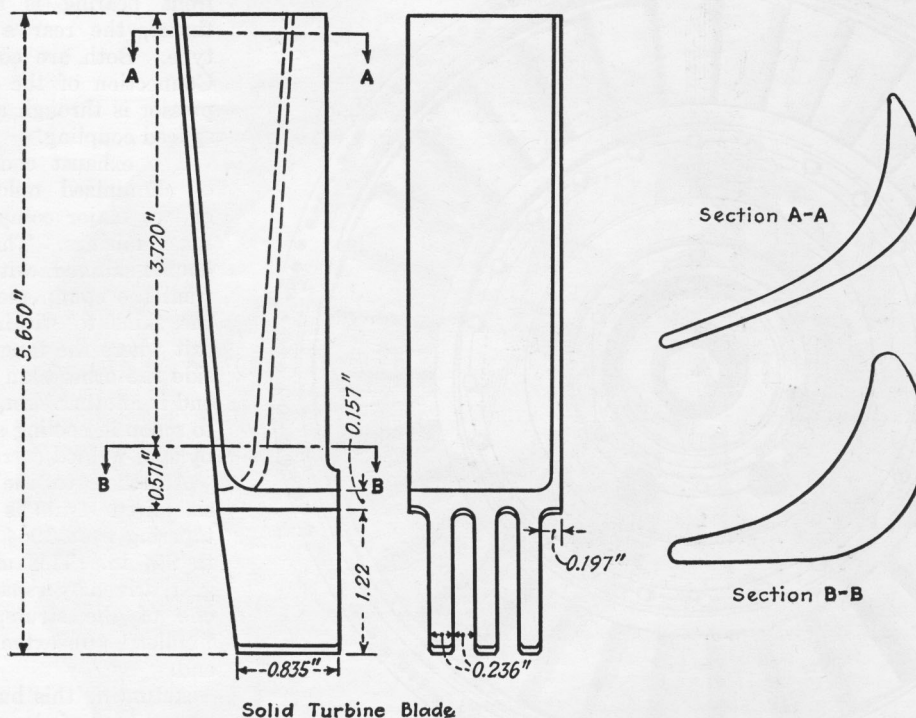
Dimensions of solid-type turbine blades used in the earlier 004 models.
